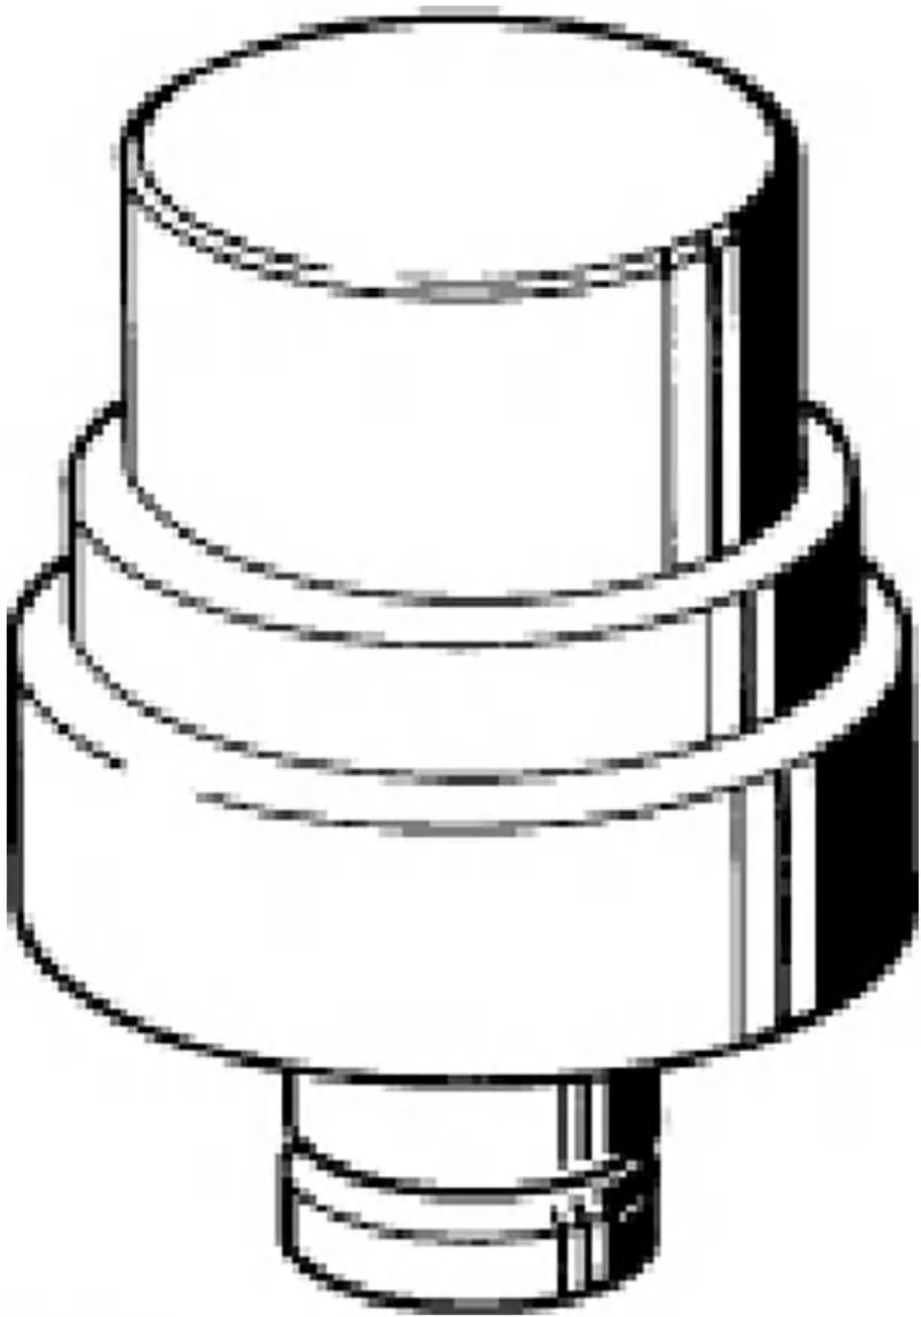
Identifying Special Tools 23 1 170 Fixture
